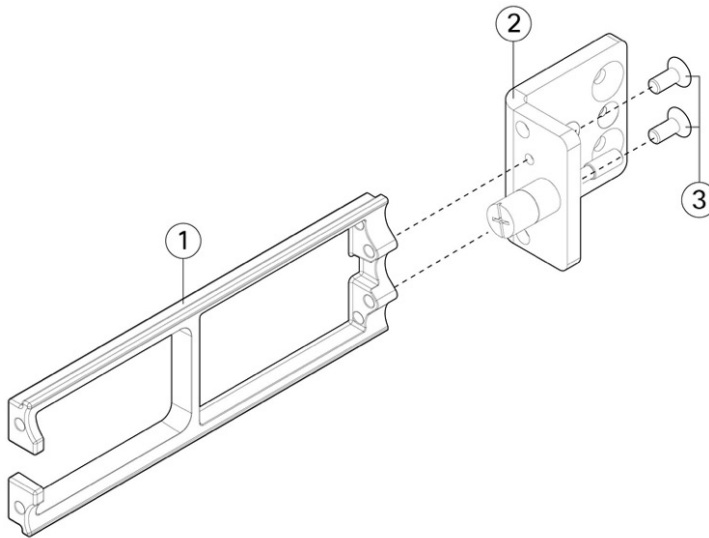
Attach the Slide-Rail Locking Bracket to the Side of the Chassis
